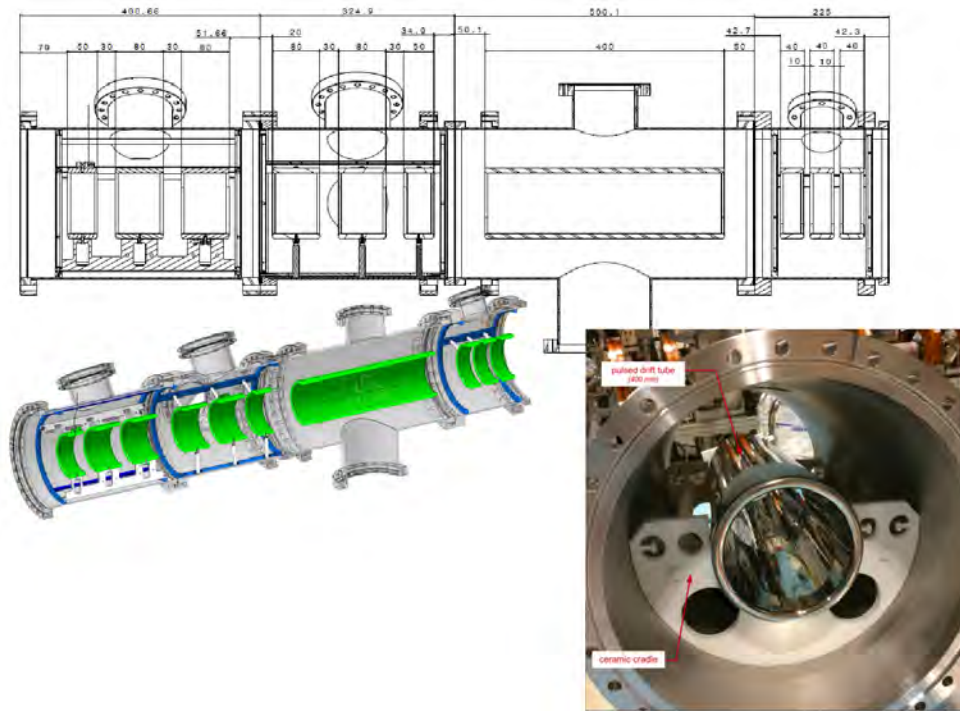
Schematic of the on-line decelerator in the new chambers with the electrode positions and dimensions. (*Inset*) - Photograph of the stainless 400 mm pulsed drift tube inside the new decelerator chamber. The PDT is mounted on the ceramic cradle.
